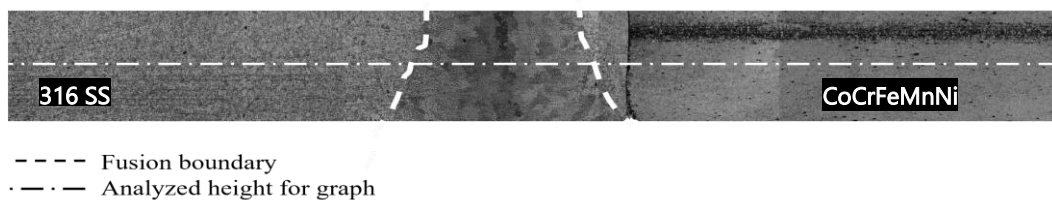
As-annealed welded joint overview, obtained by OM.
